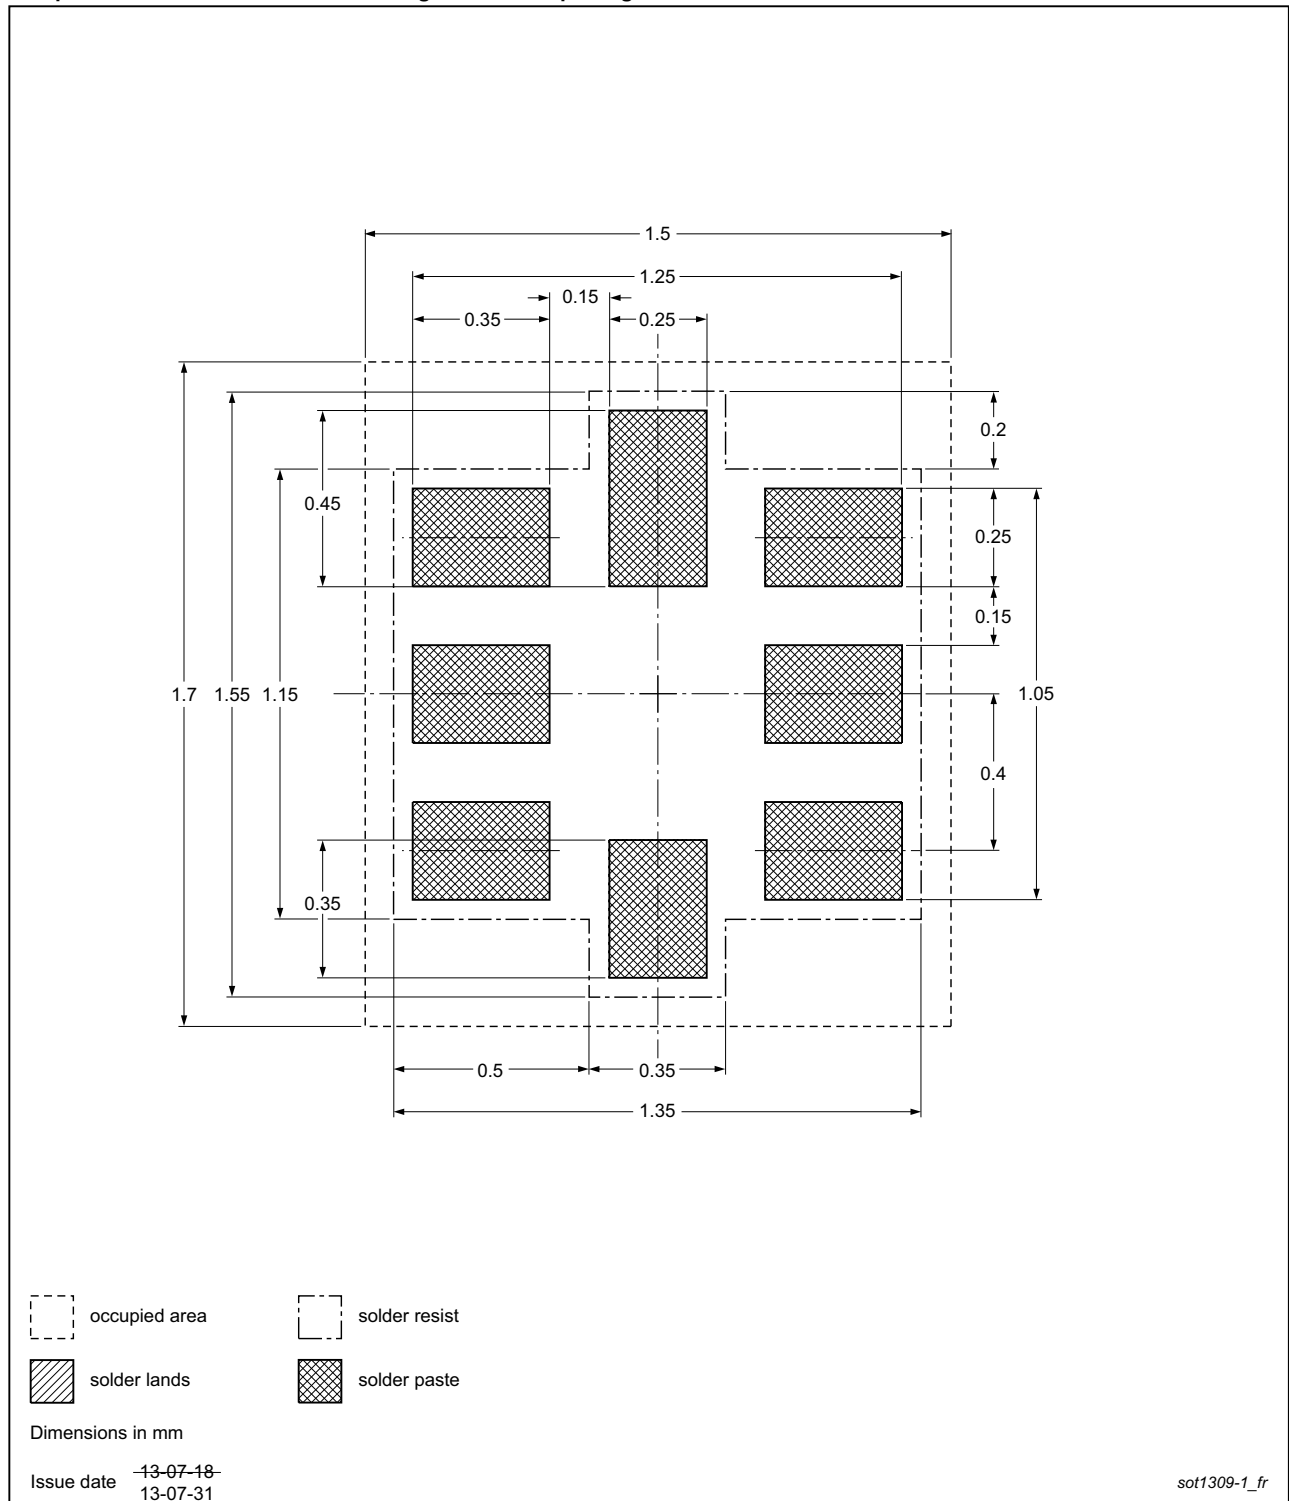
PCB footprint for SOT1309-1 (XQFN8); reflow soldering
